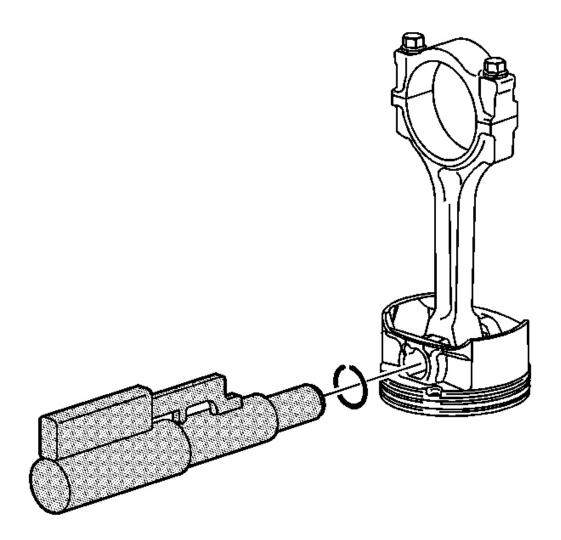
View Of Piston Pin Retaining Clips Courtesy of GENERAL MOTORS CORP.
